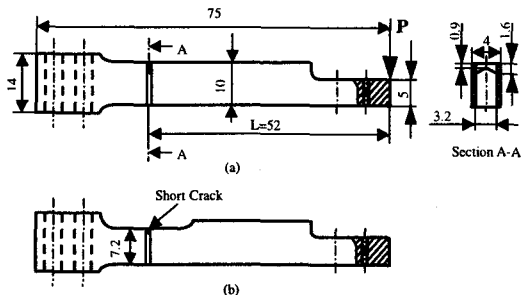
Specimen configurations of (a) prior to precracking and (b) precracked short crack specimen.
